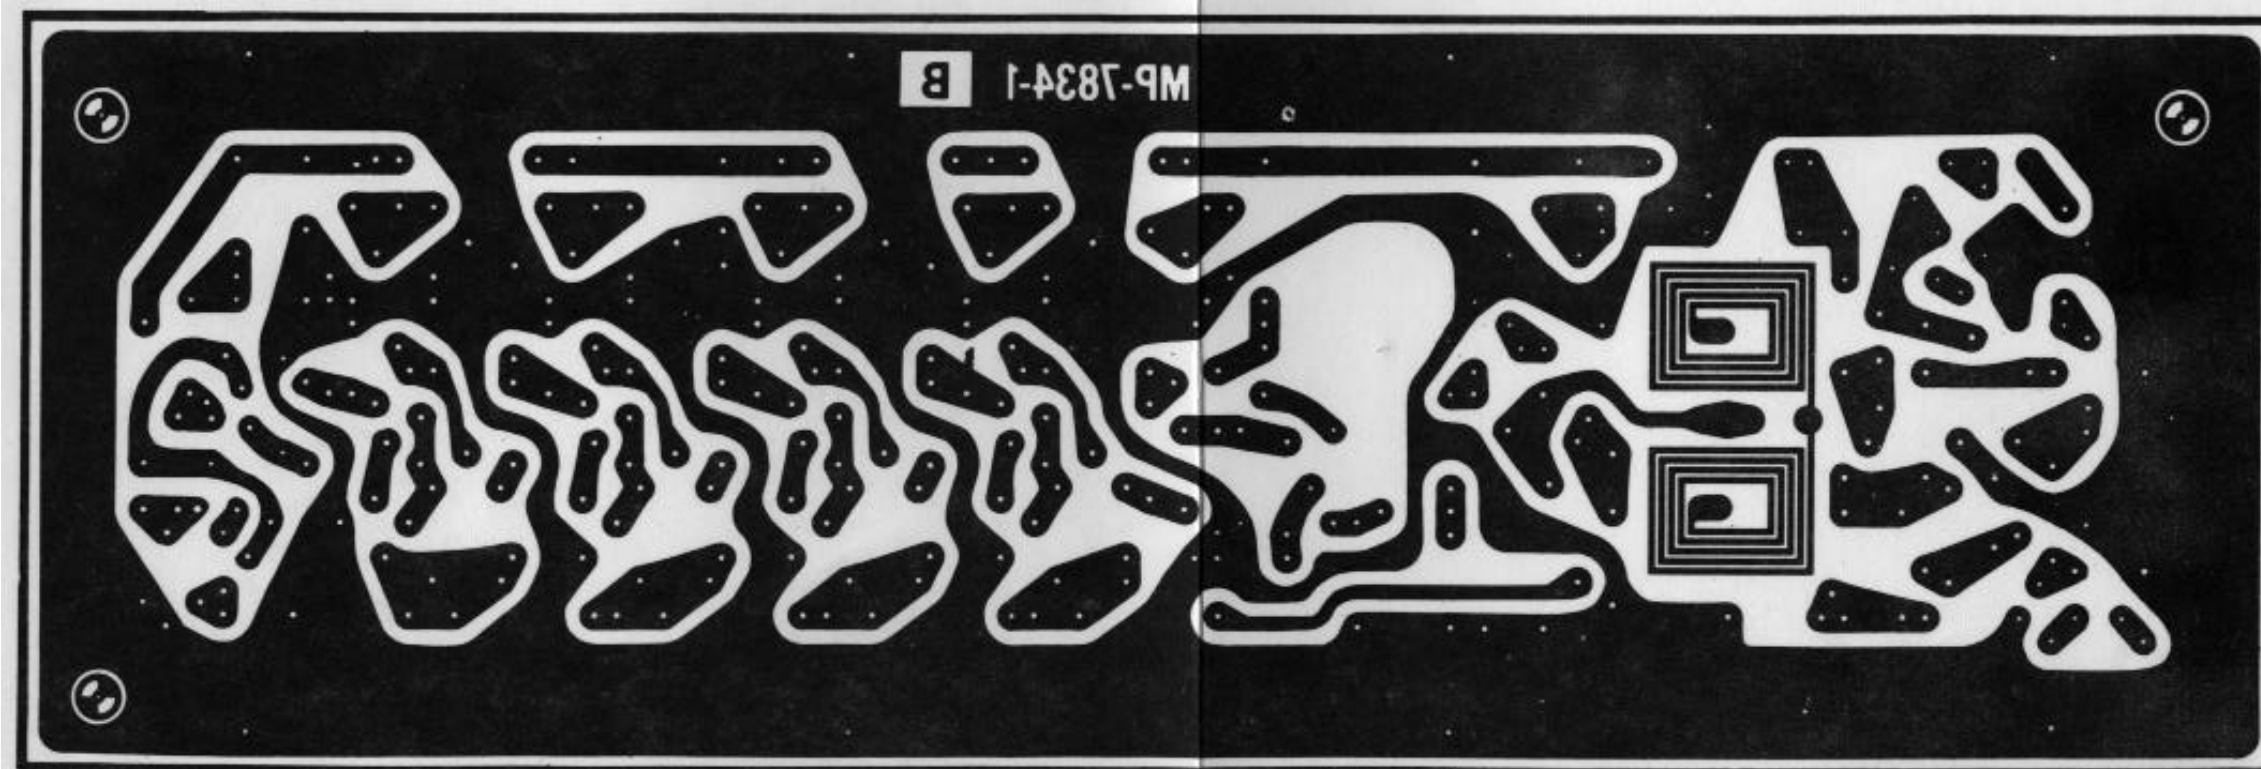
(1). Demodulator 2A17, parts location and printed wiring diagram (part 1 of 2)
